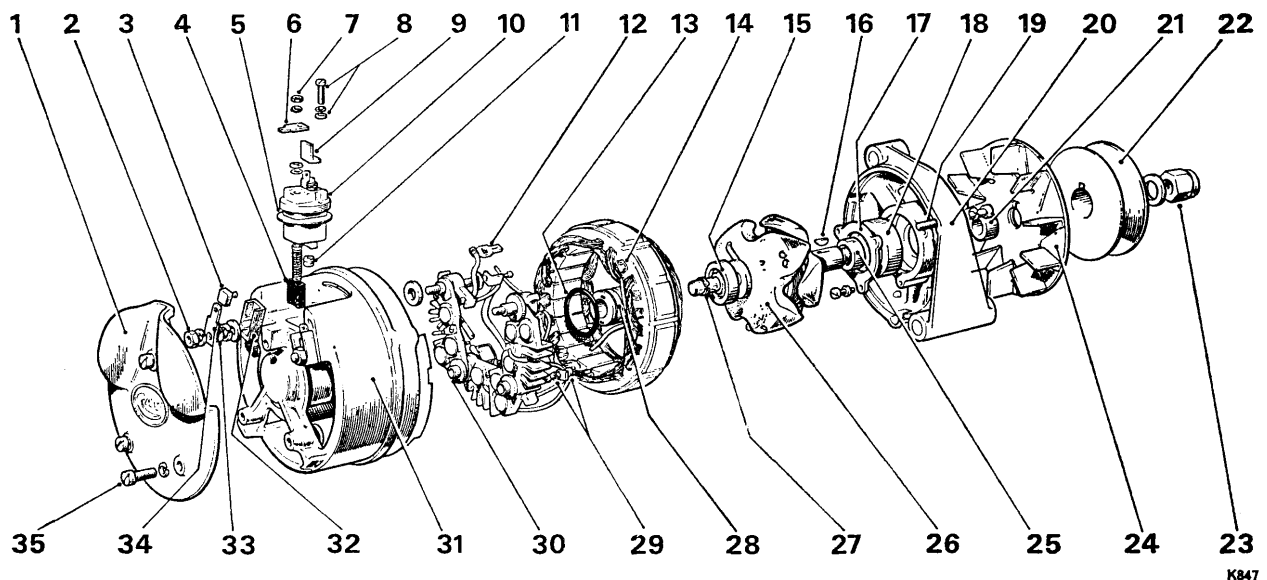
EXPLODED VIEW OF CAV 512 ALTERNATOR
